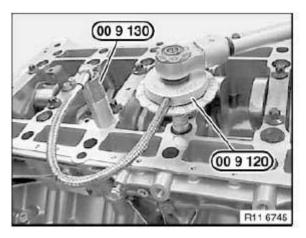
Identifying Special Tools 00 9 120 And 00 9 130 Courtesy of BMW OF NORTH AMERICA, INC.
